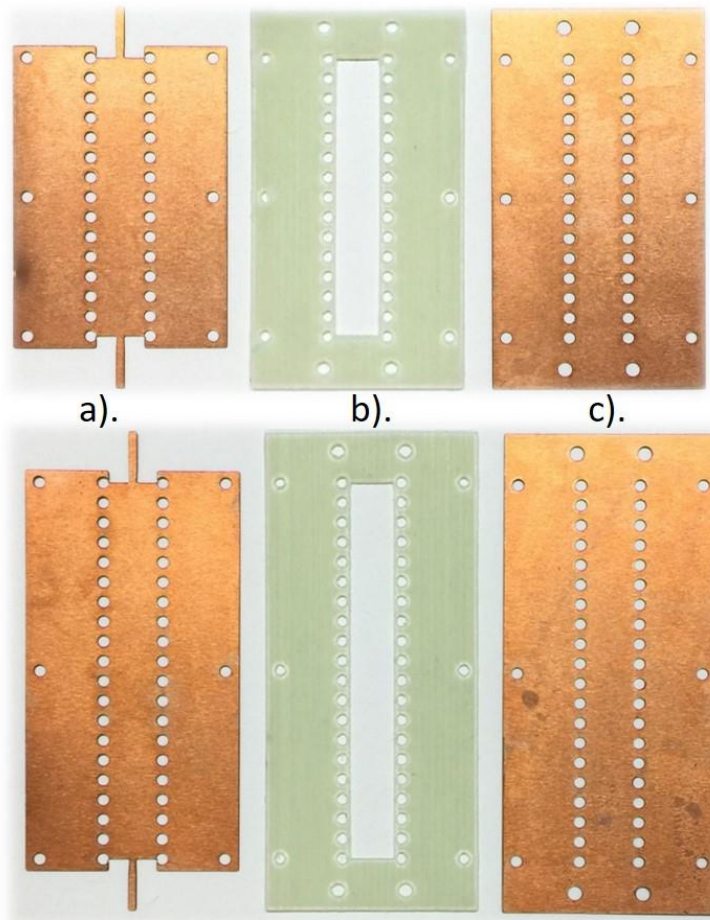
Fabricated prototypes of proposed HSIWs a). Top copper sheet, b). Inner 3D printed structure c). Bottom copper sheet
